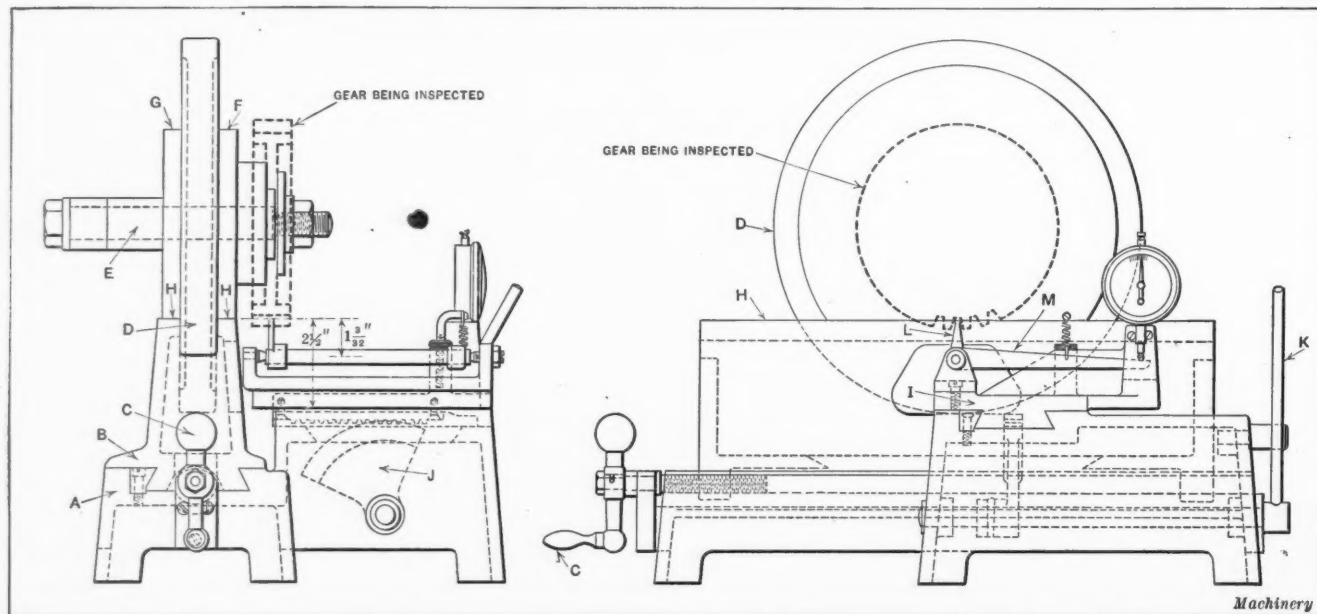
Fixture for testing Involute Curve of Spur Gear Teeth
